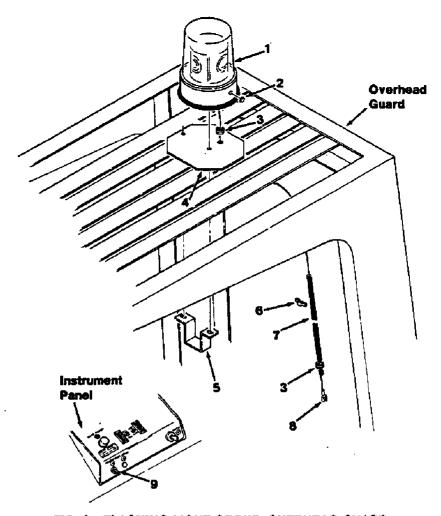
FLASHING LIGHT GROUP, OVERHEAD GUARD
